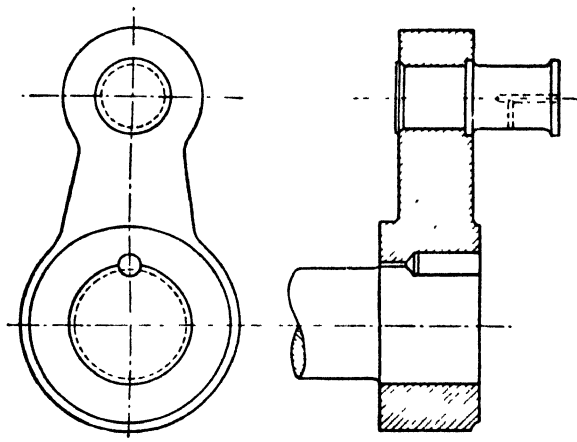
FORGED CRANK WITH SHAFT AND PIN
